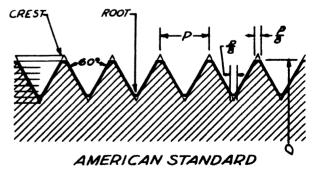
THE AMERICAN STANDARD THREAD IS V-SHAPED.
